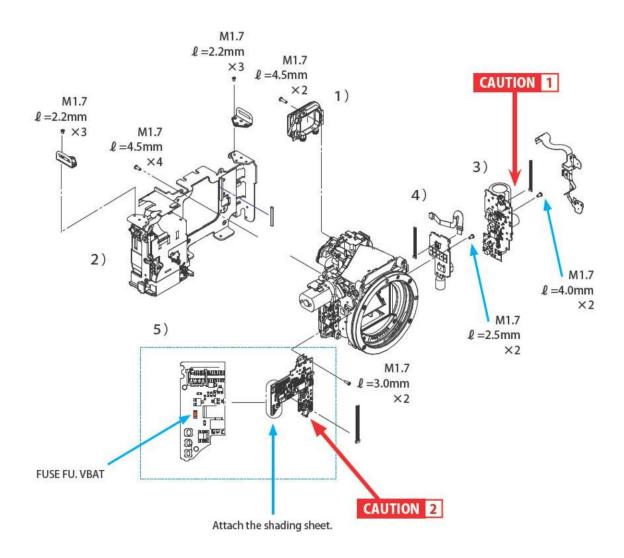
Removal of the Main Base Plate Ass'y, Flash PCB, ASD PCB, and MD PCB
